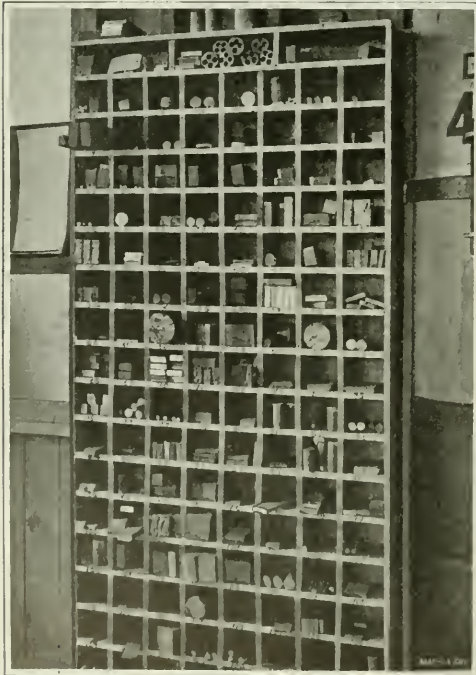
Fractured Bar Steel Samples which have been tested in the Metallurgical Laboratory
